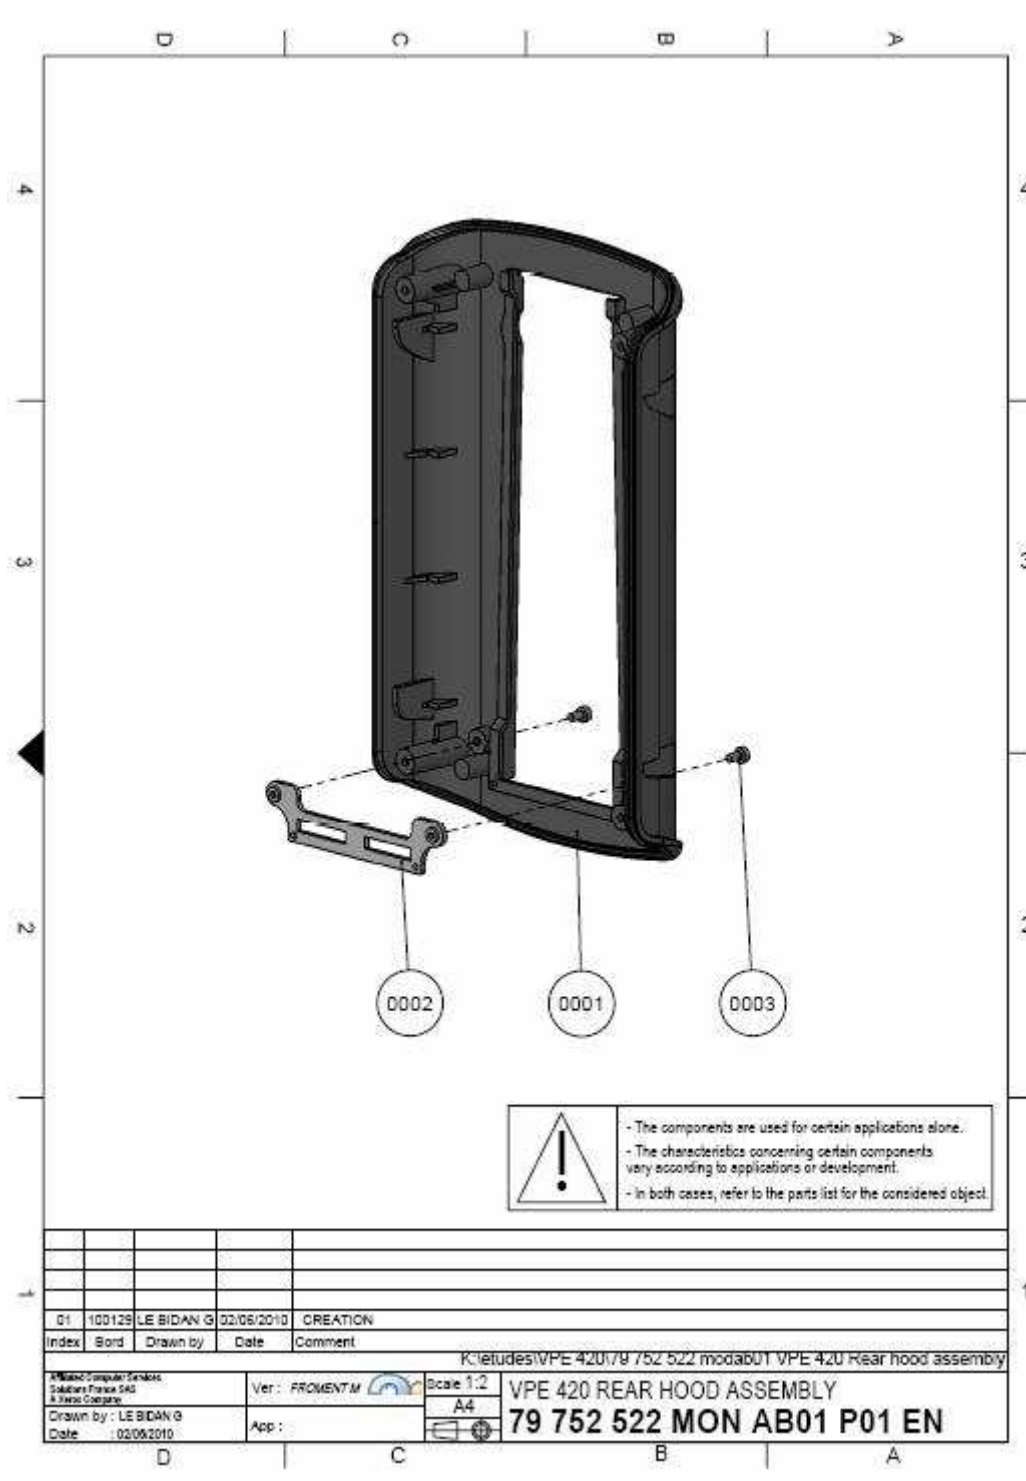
Dismantling/mounting – VPE 420 rear hood assembly
